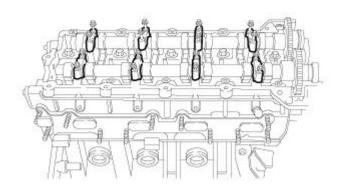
Intake Camshaft Oil Seal Courtesy of CHRYSLER LLC
